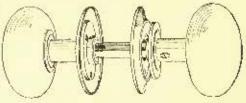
Knob with threaded Spindle. StadSaid Lags Mfg. Co.
